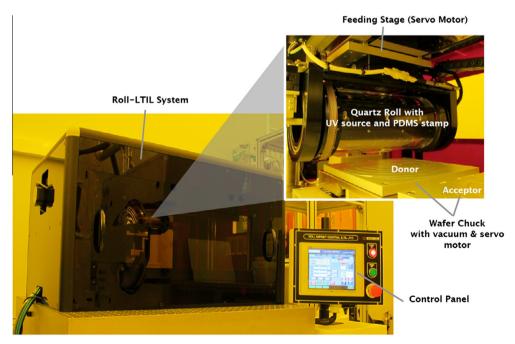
R-LTIL equipment for 8 in. wafer (developed by KIMM).
